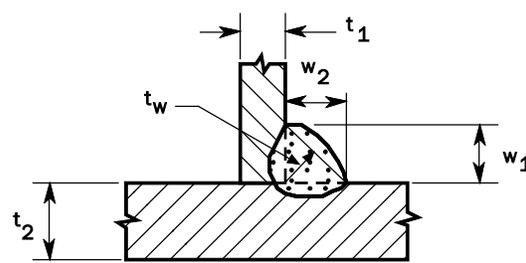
Fillet Welds - T-Joint
